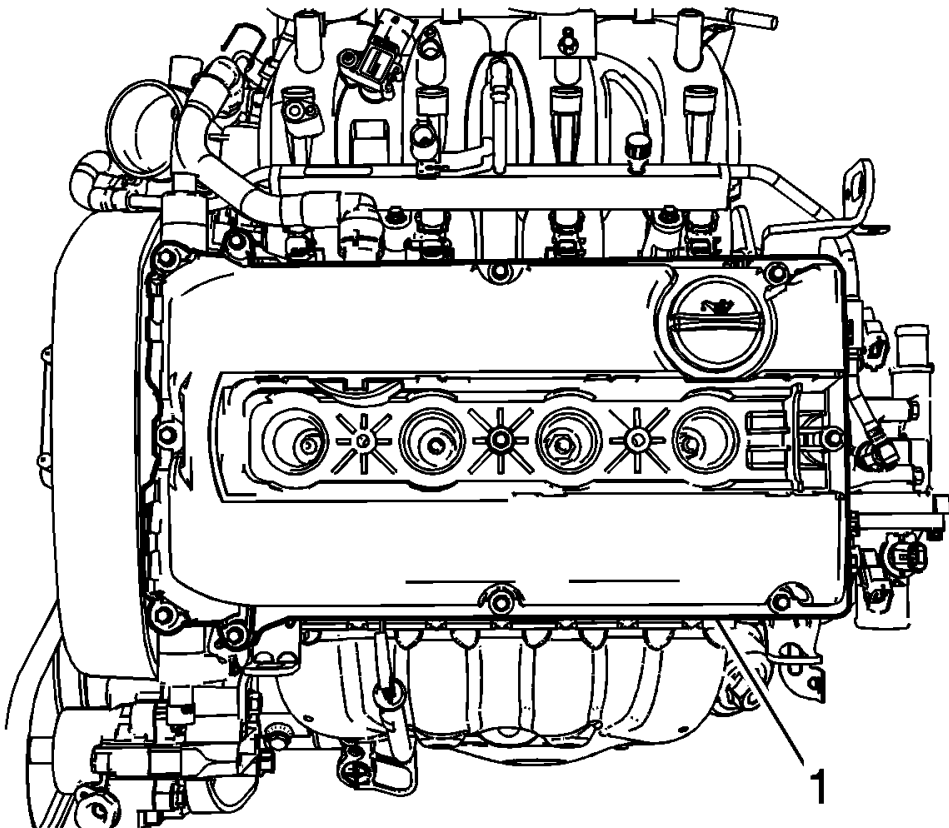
Cylinder Head CoverCourtesy of GENERAL MOTORS CORP.
